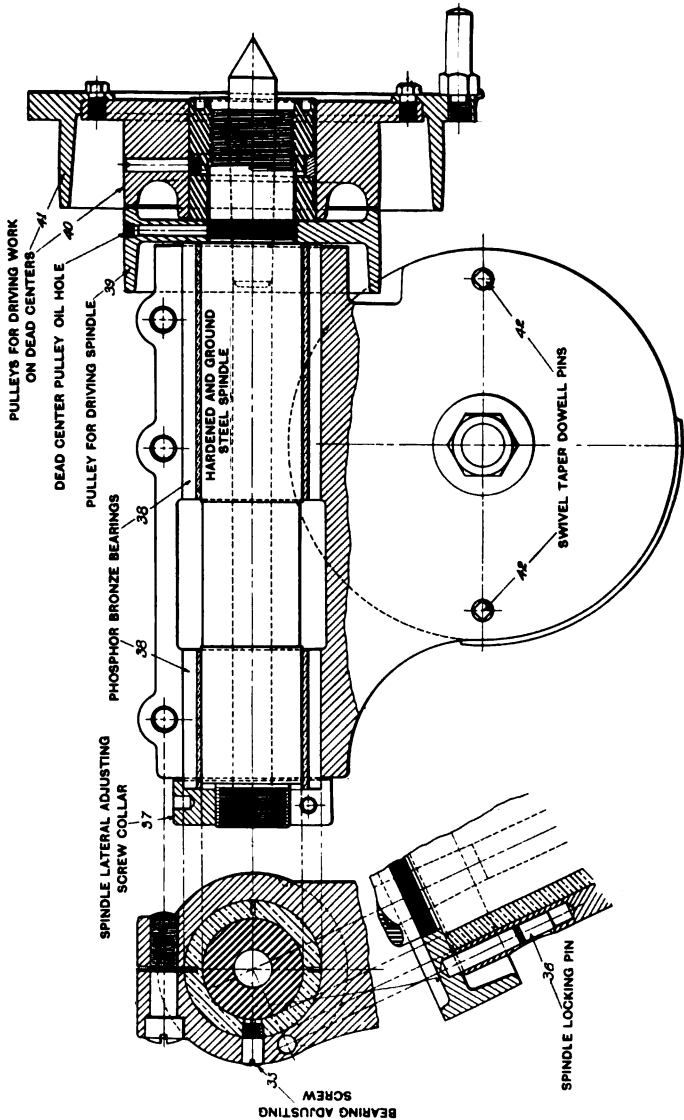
Section Through Headstock Spindle and Bearings—Small and Medium Size Universal Machines
